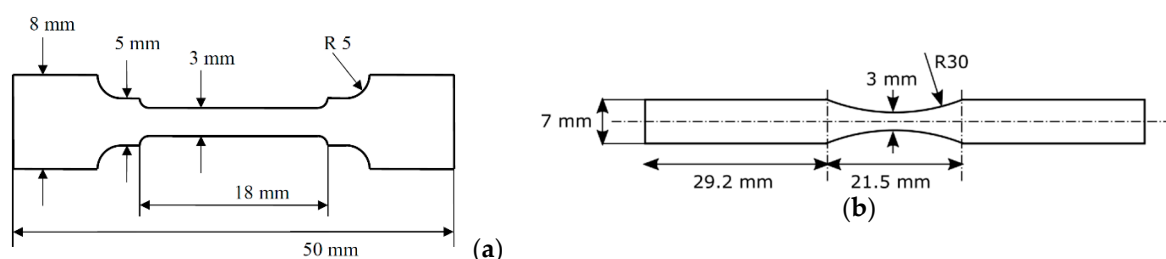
Schematic drawings of (a) tensile sample and (b) fatigue sample.
